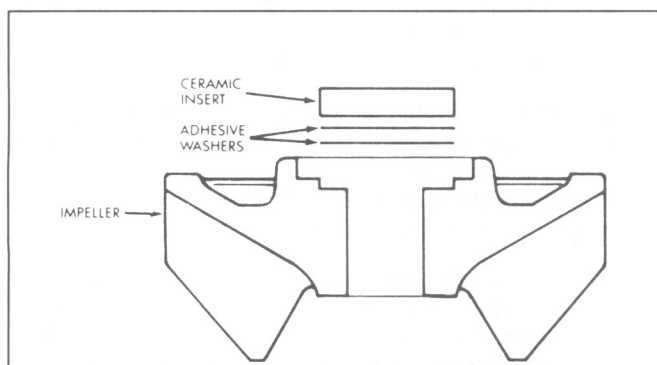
Insert, Adhesive Washer, Impeller Stackup
